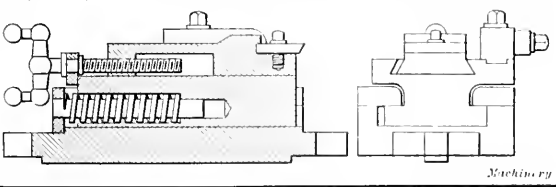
End Elevation and Sectional View of Relieving Attachment shown in Fig. 8
